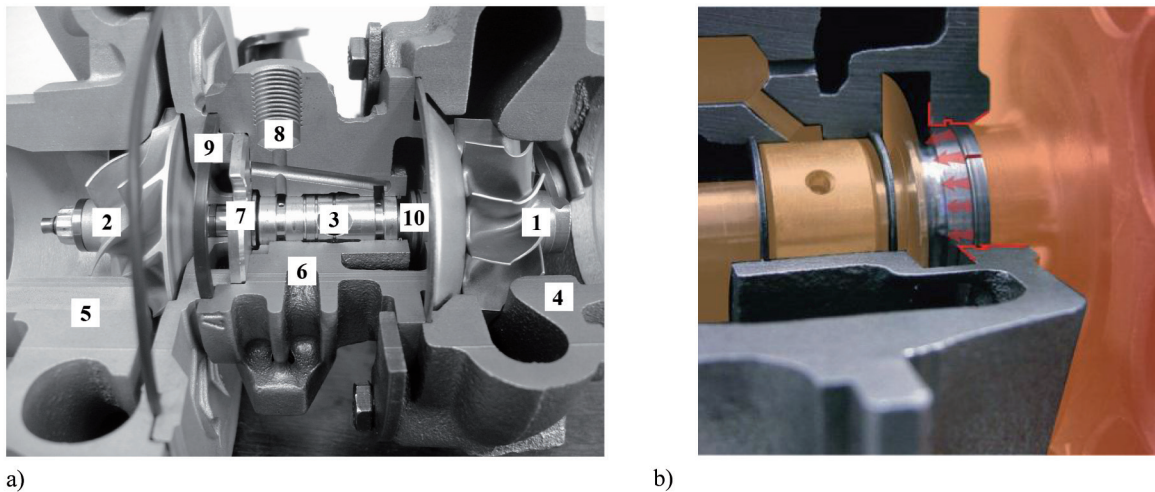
Construction of turbocharger: a) cross section; 1 – turbine rotor, 2 – compressor rotor, 3 – slide bearing, 4 – turbine housing, 5 – compressor housing, 6 – central housing, 7 – thrust bearing, 8 – oil channel, 9 – sealing ring, 10 – shaft; a) working principle of sealing ring, b) friction node analysed [L. 1]
